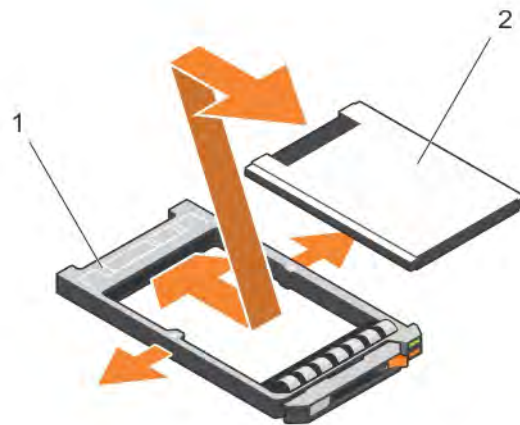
Removing and installing a 1.8 hard drive into a hard drive carrier
